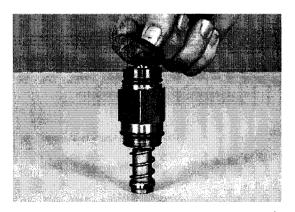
Install inching body seal. Be sure seal is mounted correctly. See figure 41.
